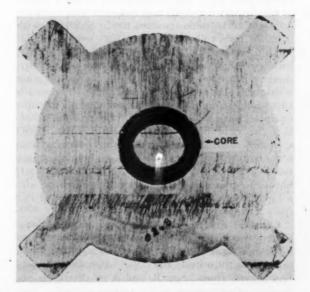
Saw cut cross-section of casting with central core showing coupon location.
